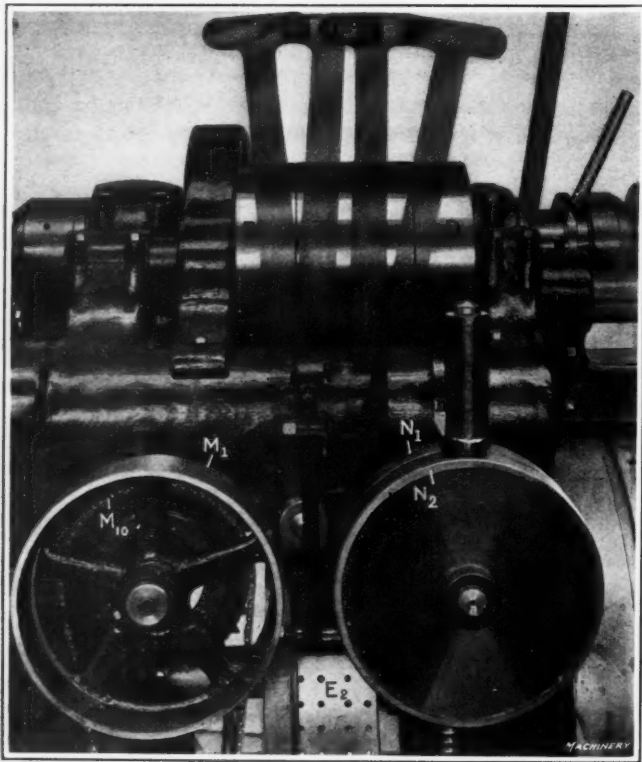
Rear View, showing Drive for Main Cam-shaft and Indexing Mechanism
